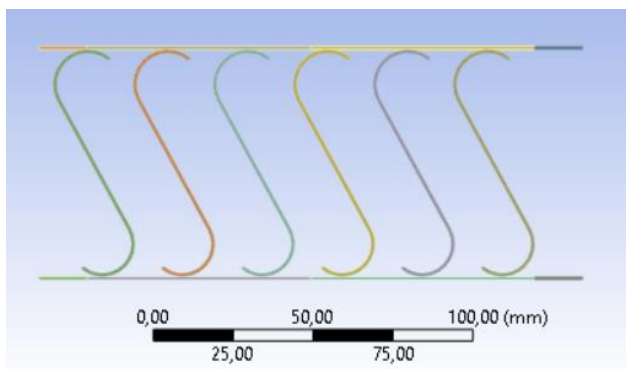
S-core sandwich panel composite drawing view S-core sandwich panel composite with a core height of 70 mm, and thickness of 0.7 mm drawing specimen view is given in Figure 1.
